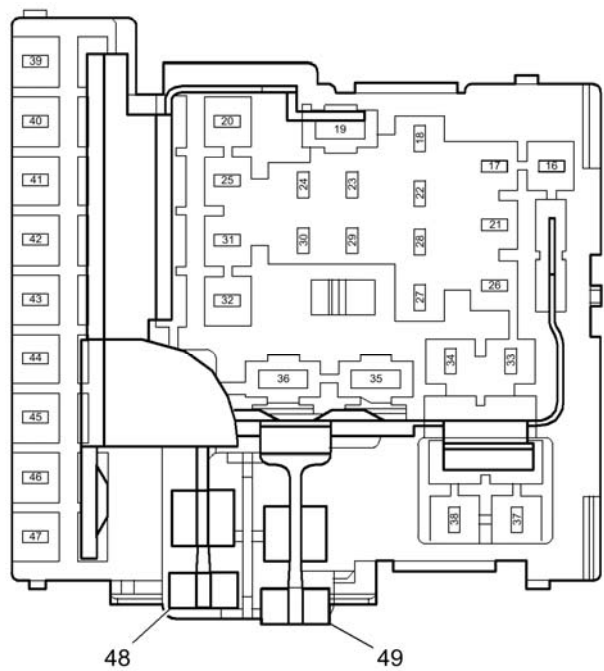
X51A Fuse Block - Instrument Panel Bottom View Fuses
